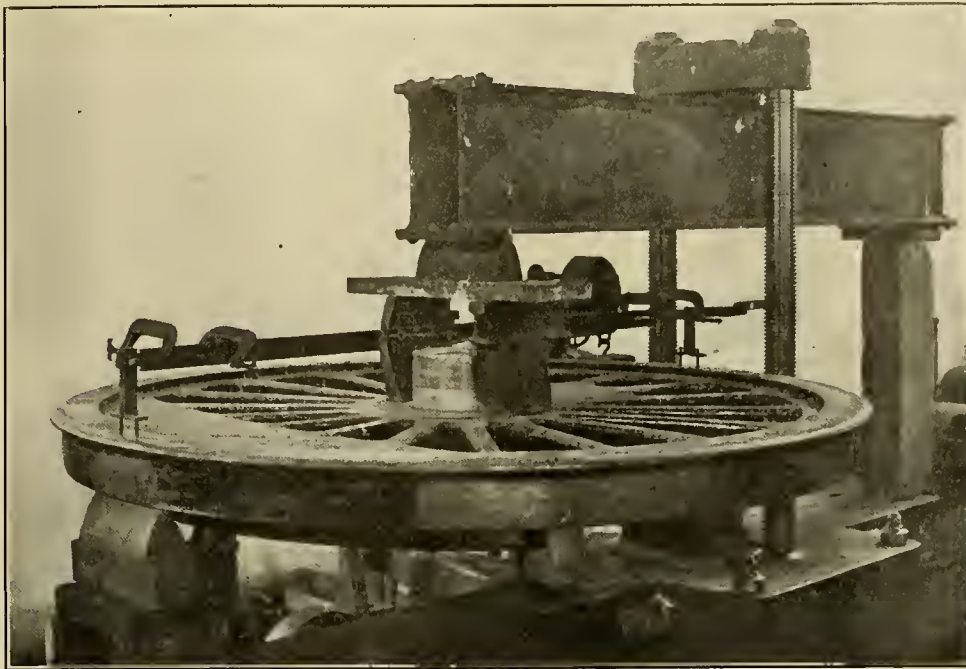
WHEEL MOUNTED FOR TESTING EFFECT OF FLANGE PRESSURE.
